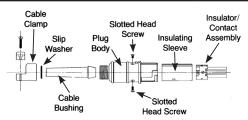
CPP Plug Assembly (Type CPP516 shown.)
